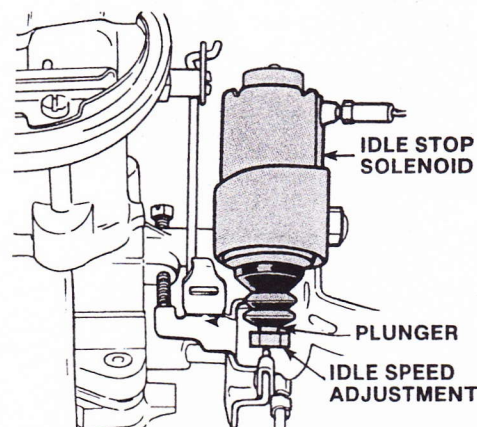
An idle stop solenoid is used to control the position of the idle setting when the ignition is turned off and on. Courtesy of Echlin Manufacturing Company
